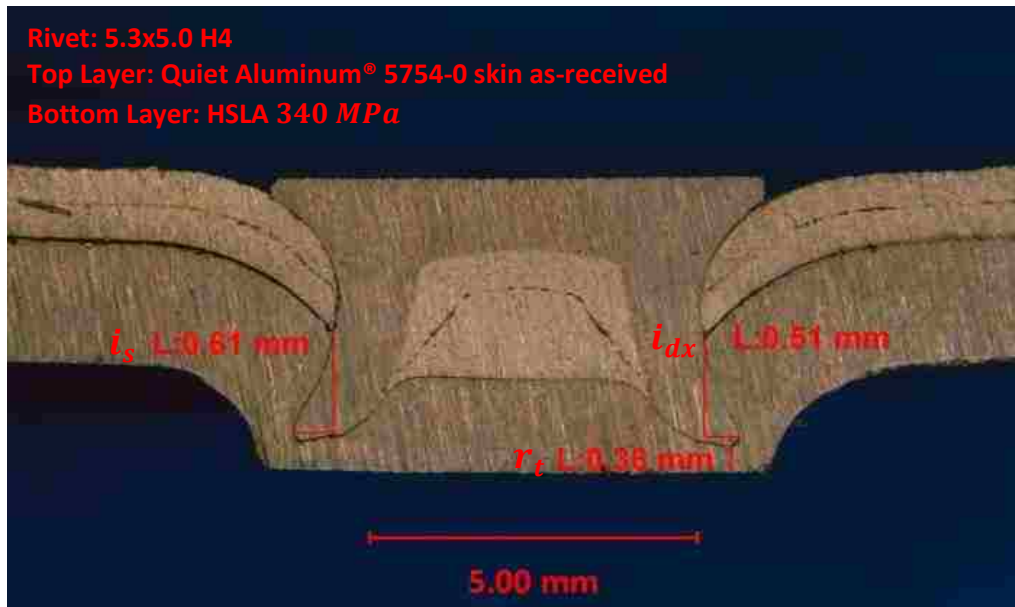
Microscope image on the cross section of the SPR joint with Quiet Aluminum® (5754-O skin as-received) and HSLA steel 340 MPa using flat die and 5.3x5.0 H4 rivet. The measurements in red indicate the inspected parameters of the joint, which showed proper interlocking and sufficient symmetry.
